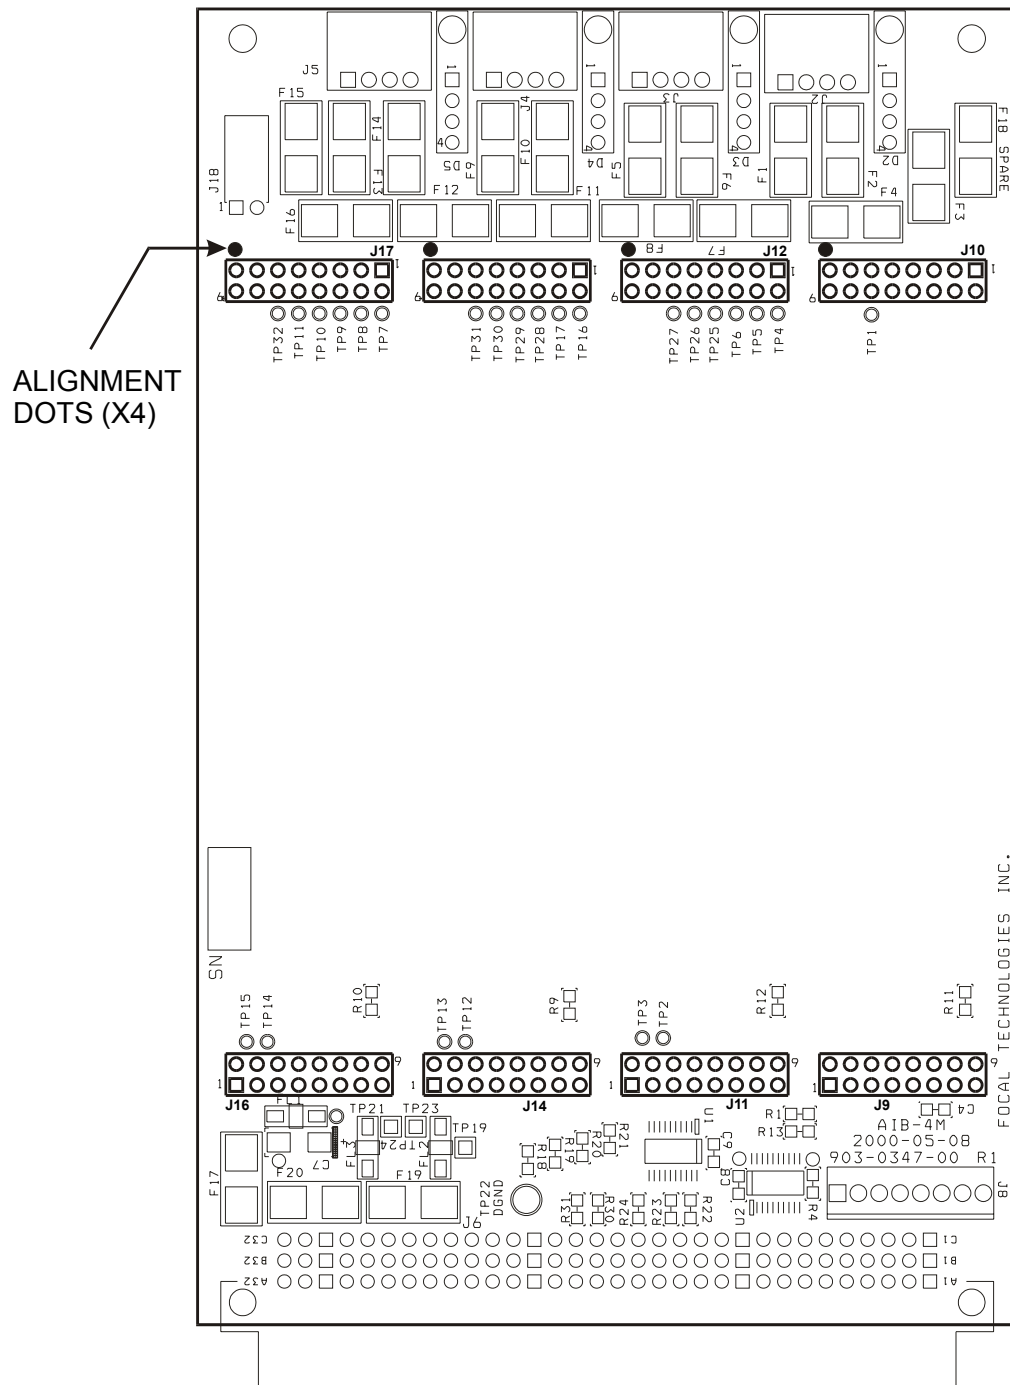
Adaptable Interface Board (AIB-4) PCB
